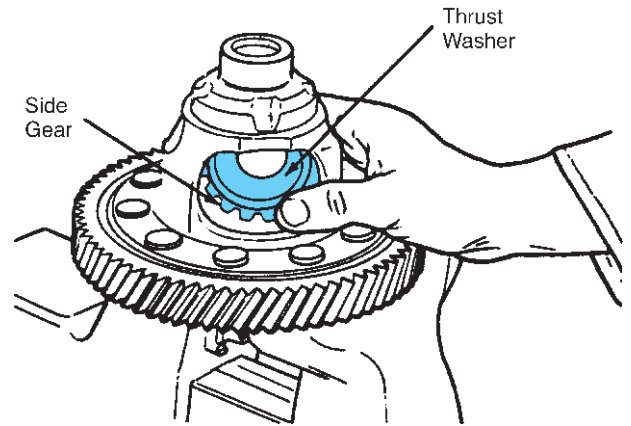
The side gears in some differentials have a rounded thrust surface and can roll out of position when the CV joints have been removed. (Courtesy of Ford Motor Company)
